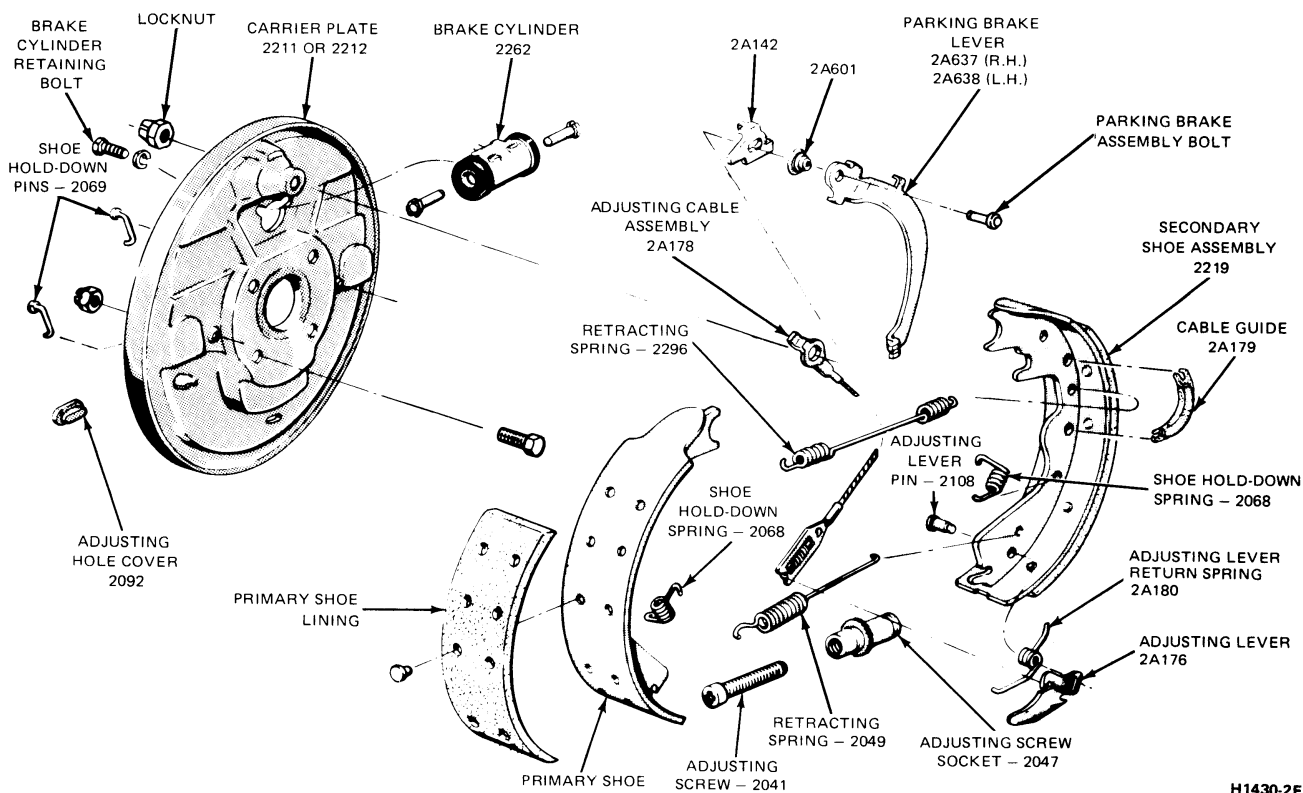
F-250, F-350 and E-250, E-350 Rear Web Ledge Single Anchor Brake—Disassembled
